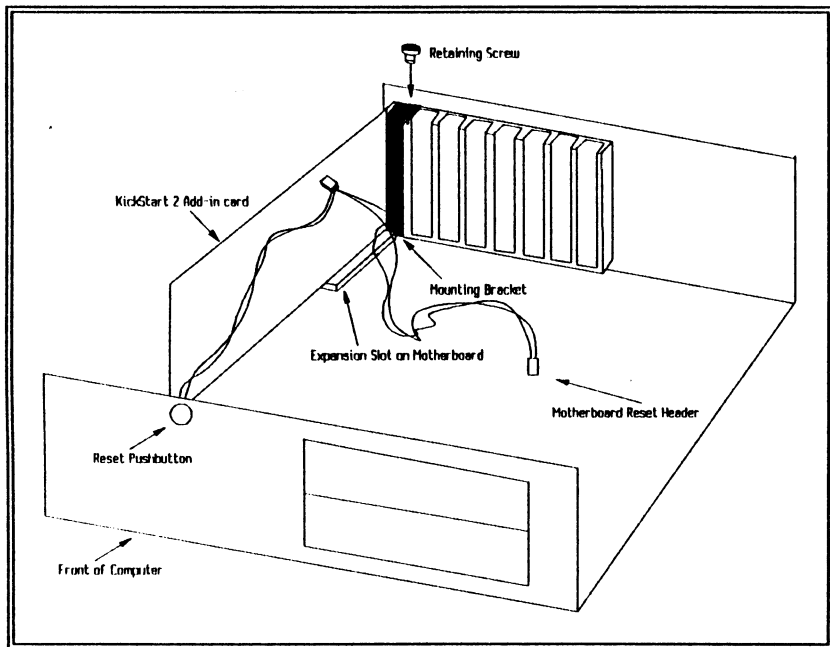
Fasten Card in Place With Mounting Bracket Screw
